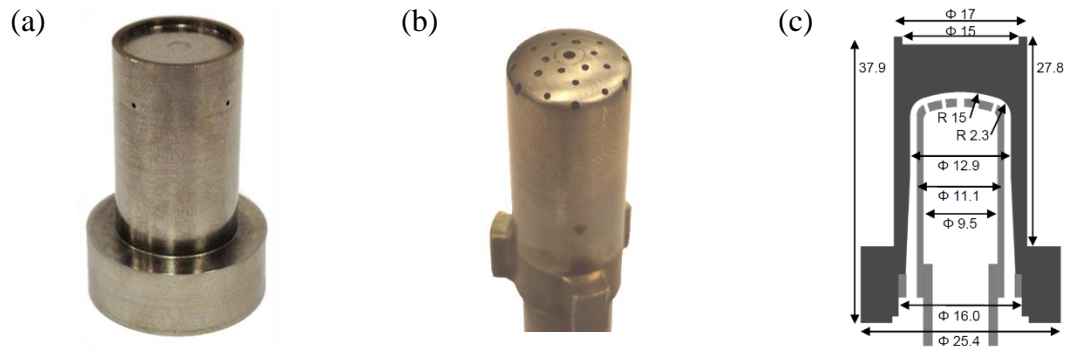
Pictures of (a) the W-alloy outer shell and (b) the steel jets cartridge. (c) A cross-section of the HEMJ test section (dimensions in mm).
